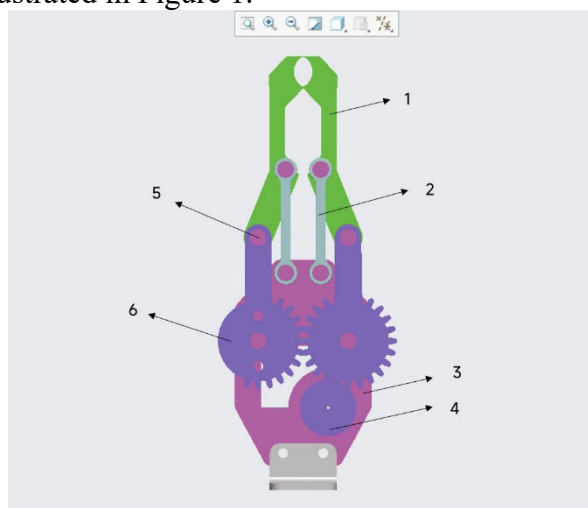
3D Model of the Gear-Driven Mechanical Gripper
